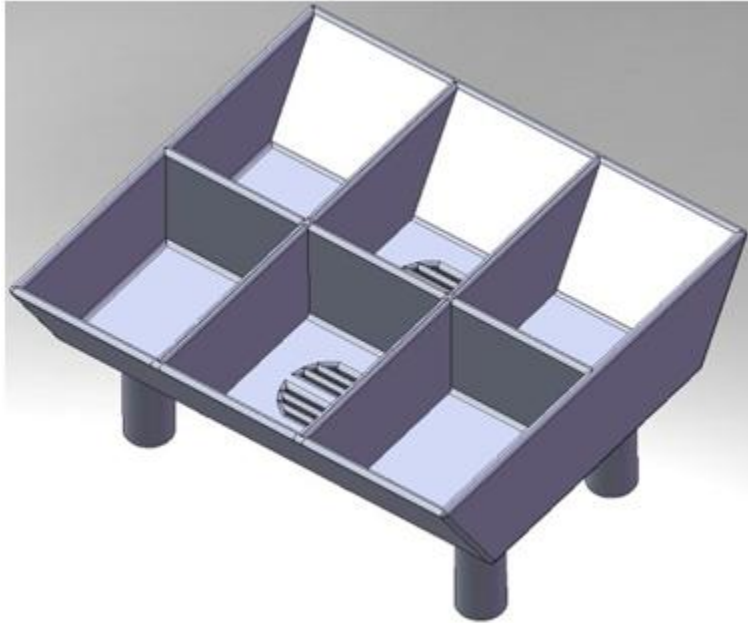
Proposed Laundry Facility (Granfone *et al.*, 2008)
